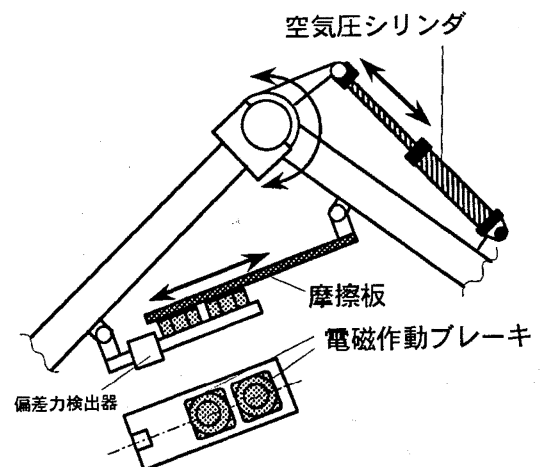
Construction of the elbow joint. 肘関節部の構造
